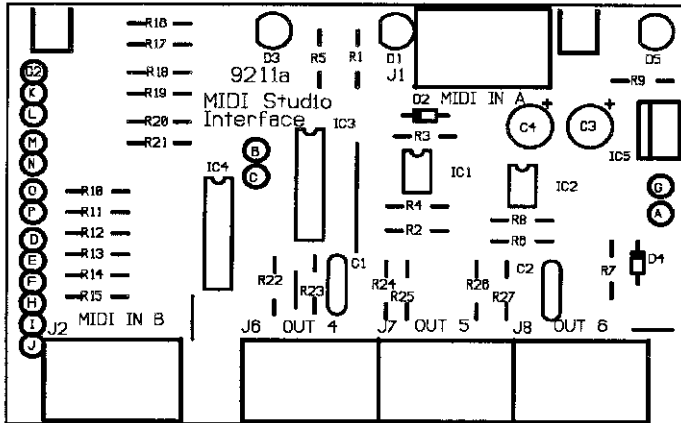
Components are mounted on the circuit board in the locations shown by this parts placement drawing.
